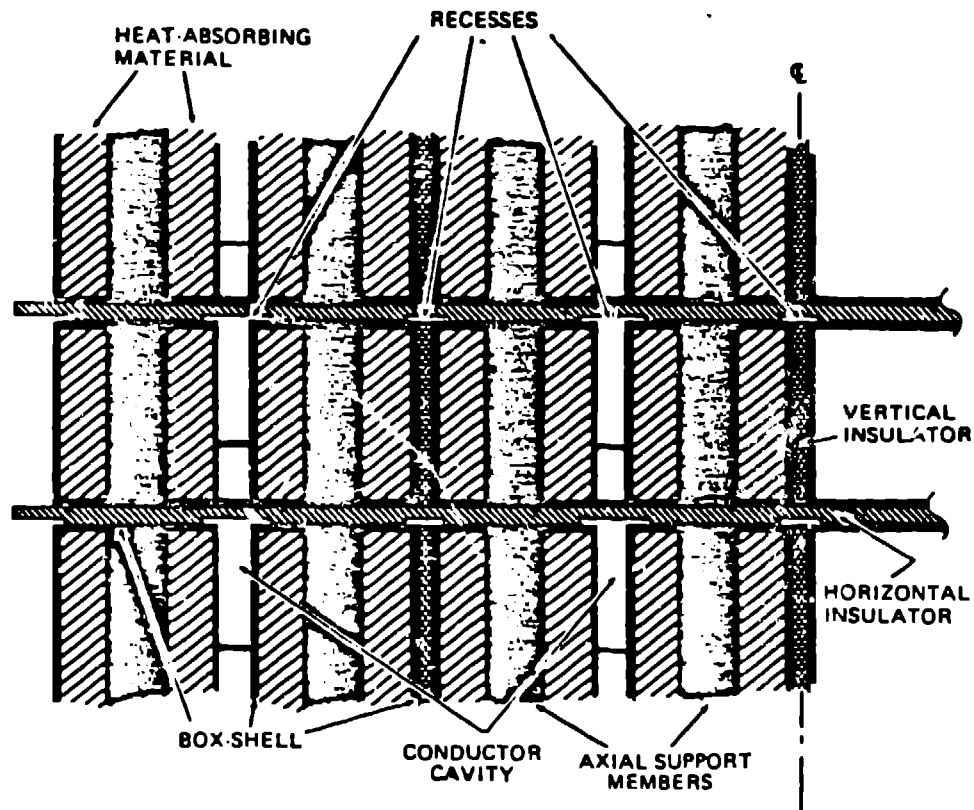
COIL CROSS SECTION SHOWING VERTICAL AND HORIZONTAL INSULATOR DETAIL
